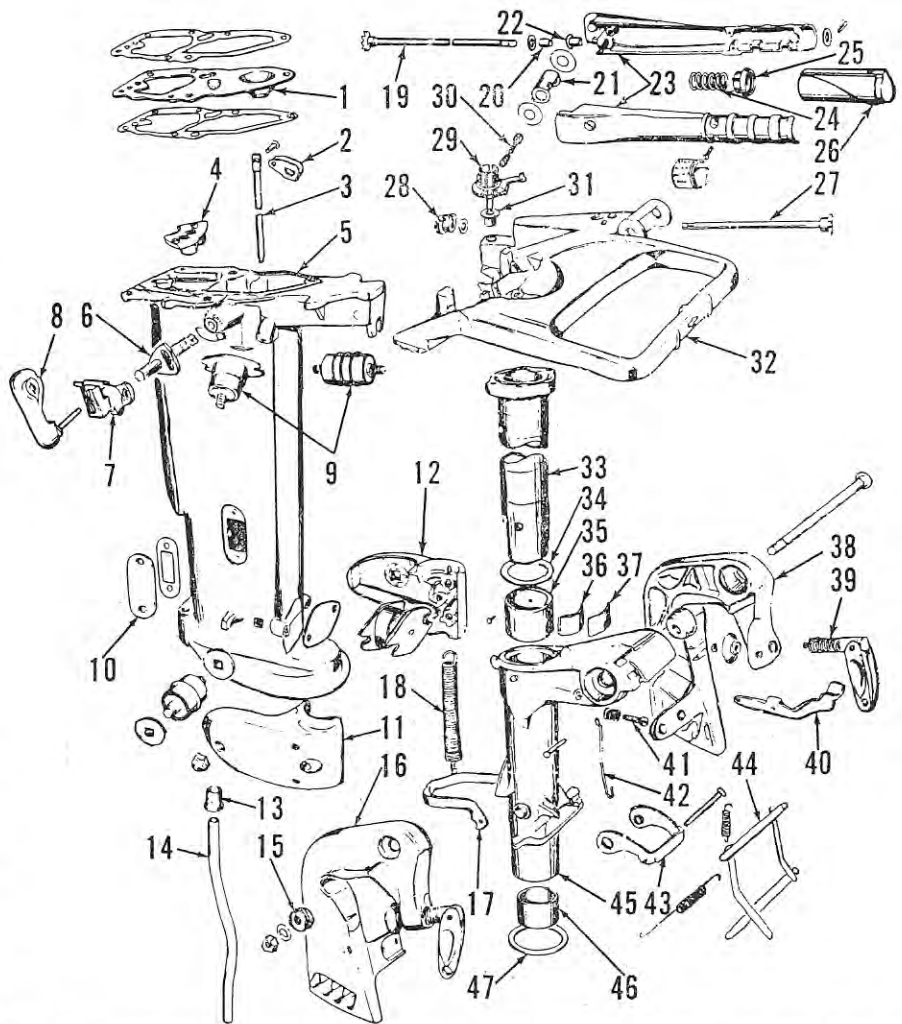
Exploded view of stern bracket, exhaust housing, drive shaft housing and associated parts used on 1959 production 12 horsepower models. Other models are similar.
